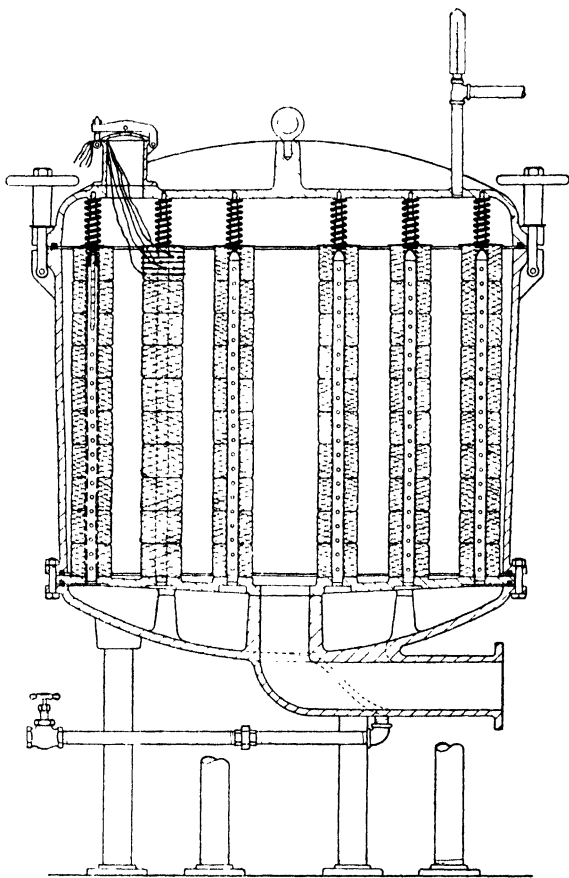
Cross Section of Franklin Process Package Dyeing Machine for Cotton Yarn showing sampling arrangement
